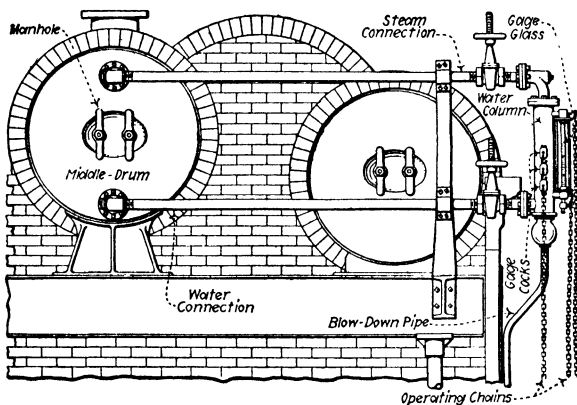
Water column and connections on Stirling water-tube boilers.
